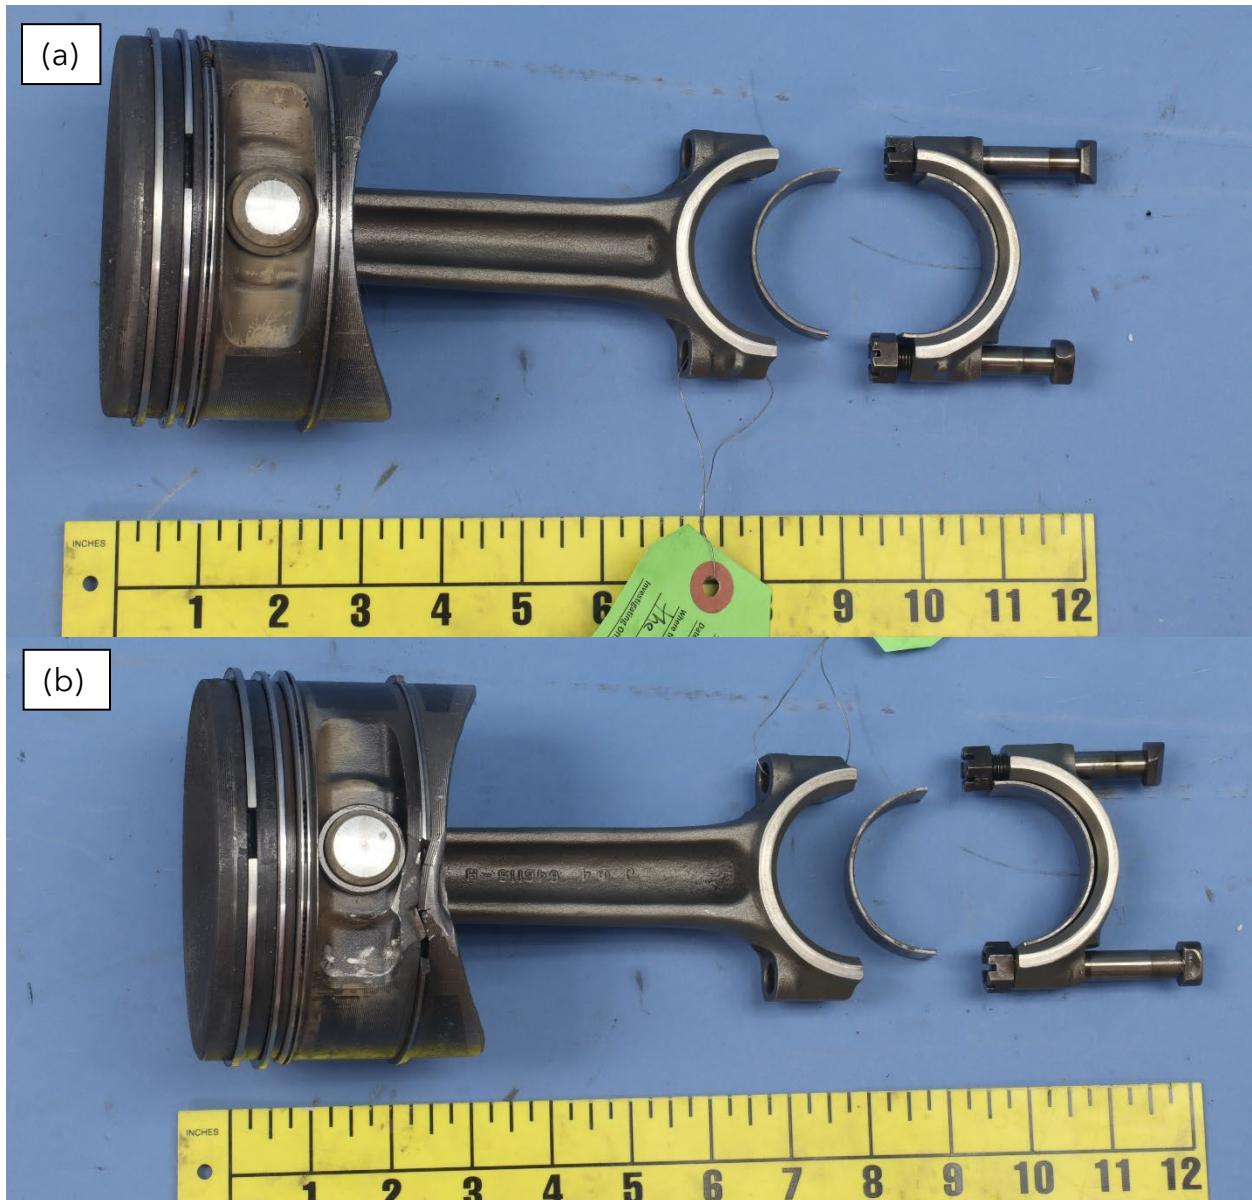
View of the opposite side of the #2 piston and connecting rod assemblies.
